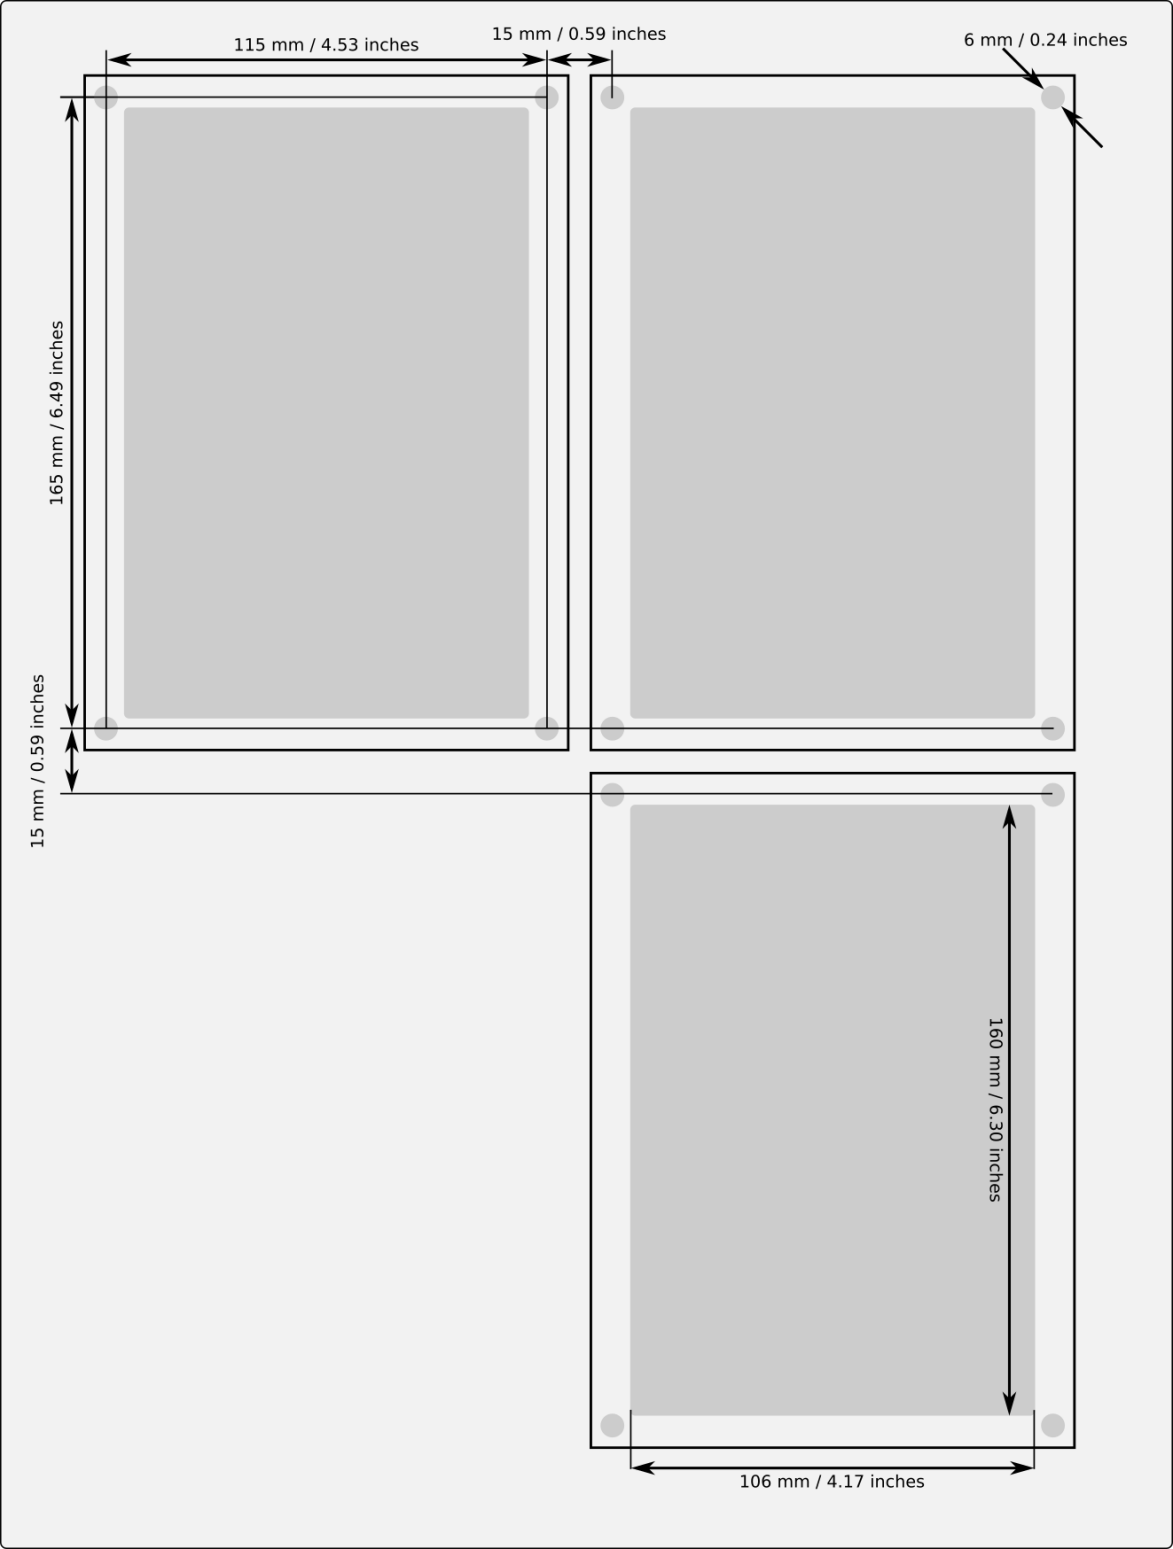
72. Panel cutout dimensions and device spacing.
